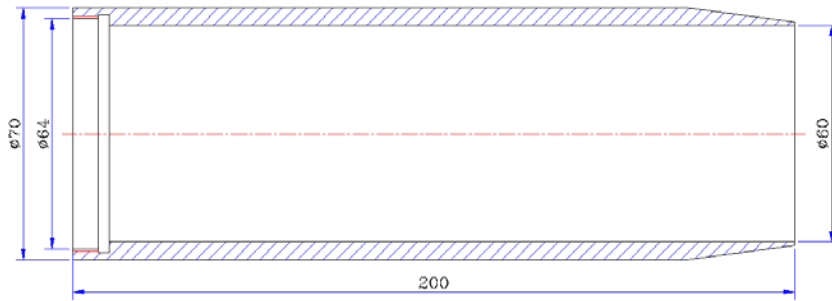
Two-dimensional drawing of inner nozzle (mm)
